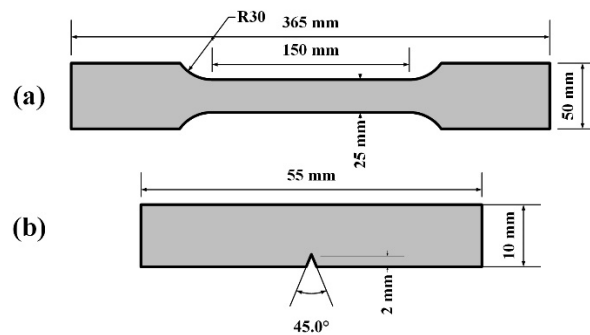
Size of (a) tensile test sample; (b) impact test sample.
